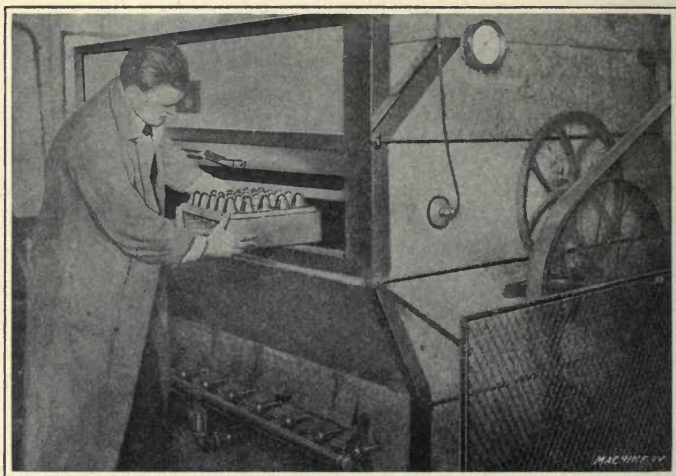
Baking Varnish on High-explosive Shell Fuses
